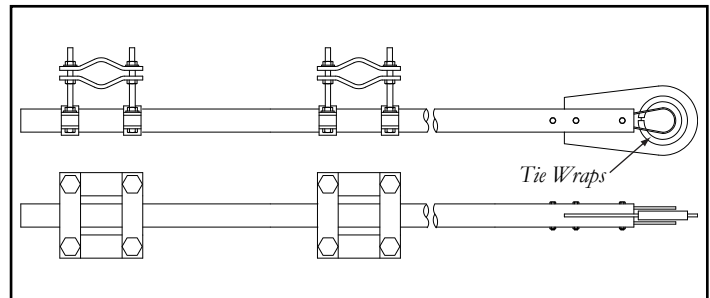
DSH2H3S Fiberglass Outrigger Assembly.
